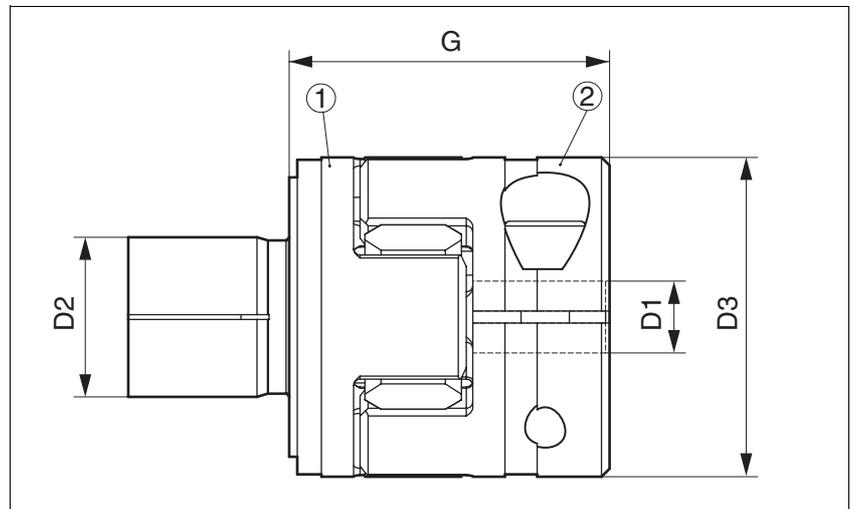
Outline drawing of expanding hub (1) and clamping hub (2)
